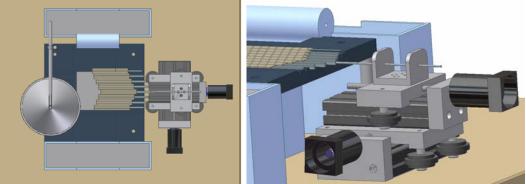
Finger mask system design. A similar mechanism mirror to this mask system will is placed on the other side of the machine.
